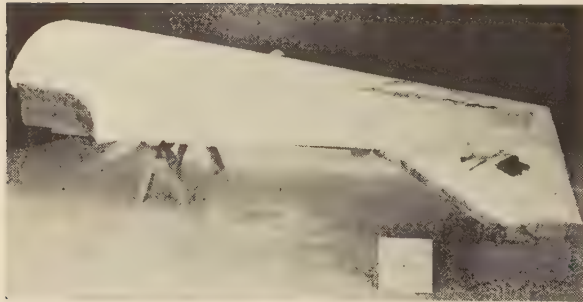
FOUR LAYERS OF SPRUCE VENEER BONDED WITH THERMOSETTING UREA GLUE FORM THE FUSELAGE SKIN WHICH IS MOLDED IN HALVES
